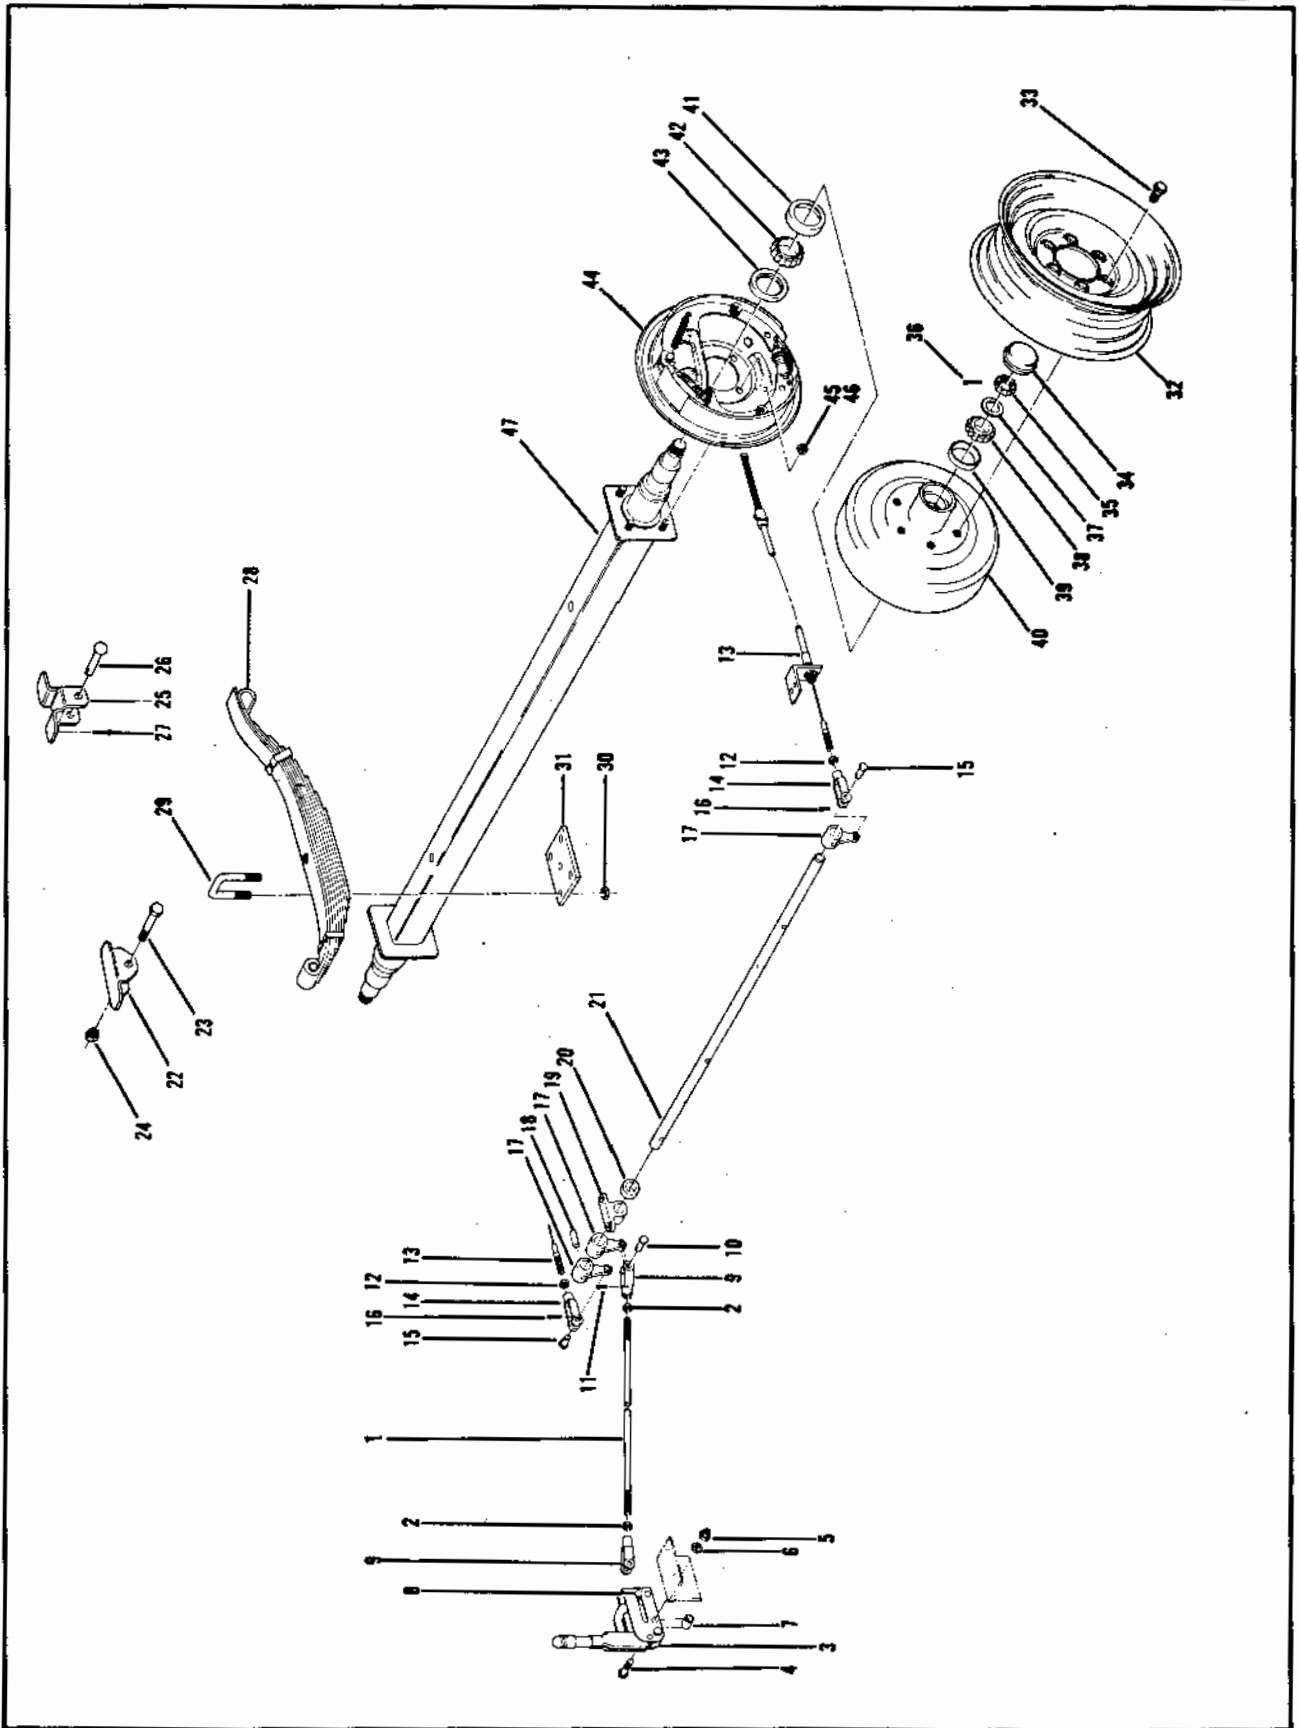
Handbrake Lever, Cross Shaft, and Rear Axle Group
